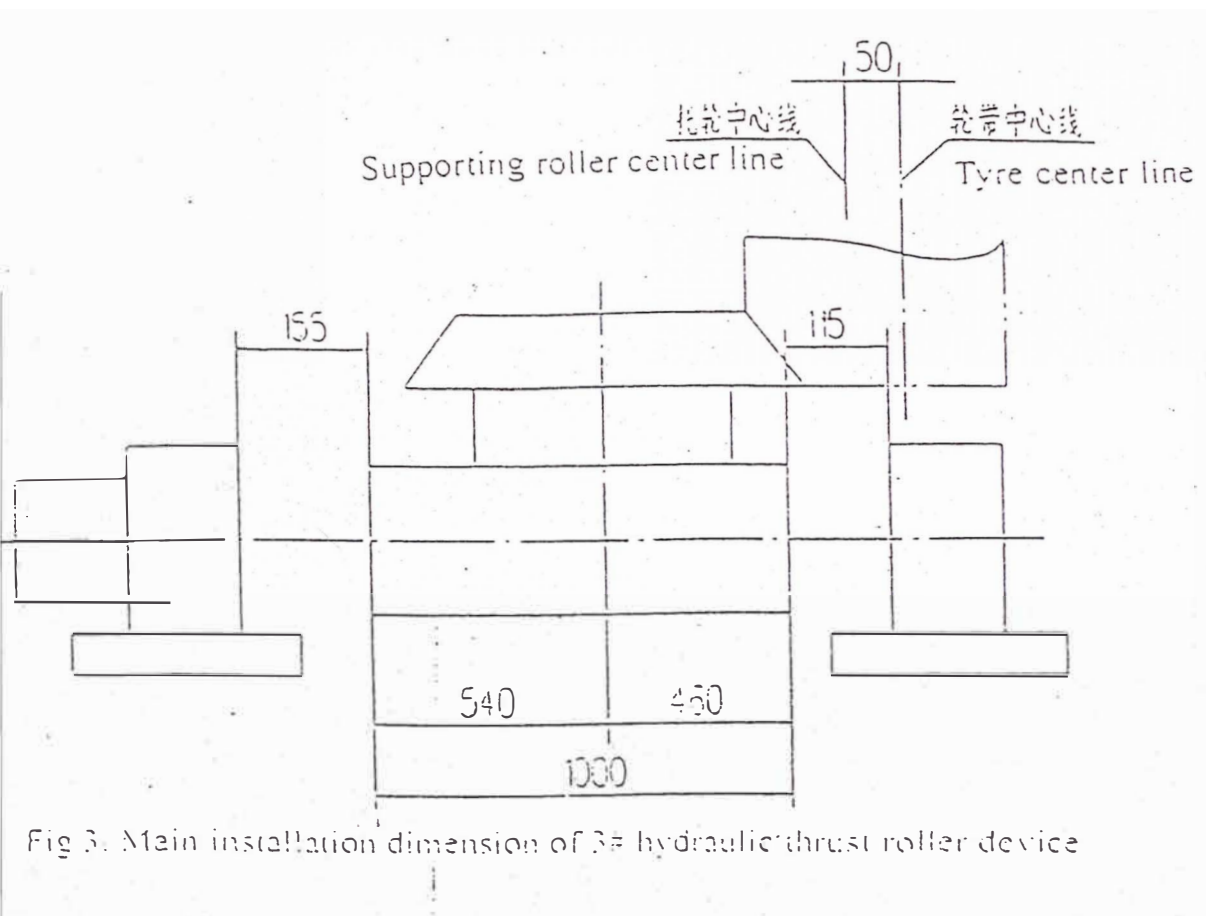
Main installation dimension of 3# hydraulic thrust roller device
